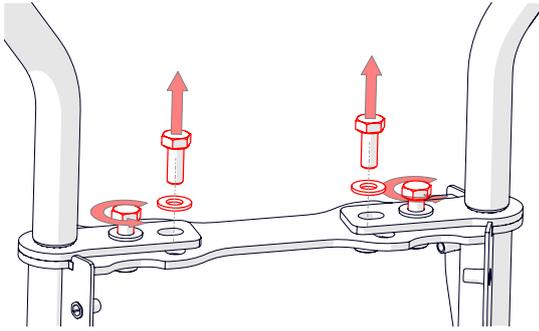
F - Loosen outer bolts, remove inner bolts (top console removed for clarity).
